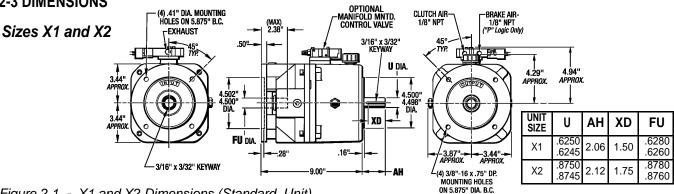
X1 and X2 Dimensions (Standard Unit)
